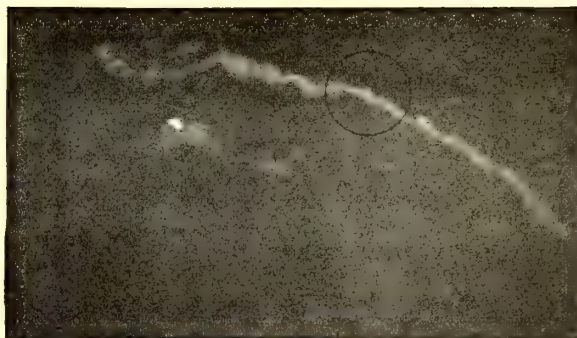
An X-Ray Photograph of a One-Ton Steel Casting Disclosed the Serious Flaw or Hole Marked by the Circle.
